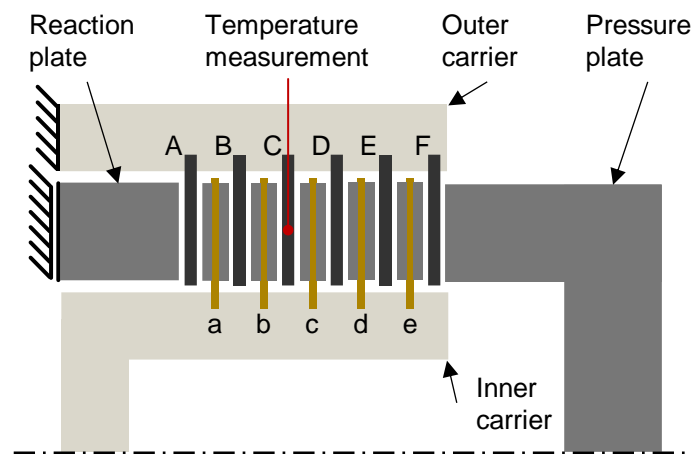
Schematic assembly of a clutch disk set with outer toothed steel plates and inner toothed friction lining disks in the component test rig KLP-260.
